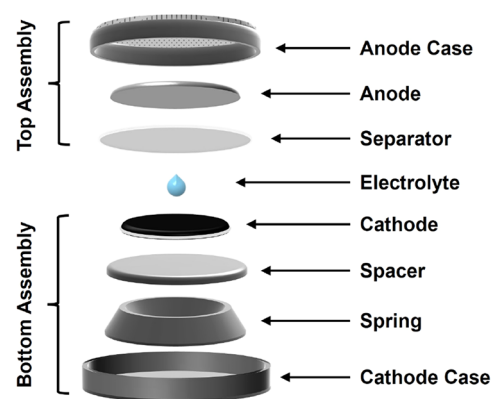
Schematic representation of the components of a coin cell with a relative position in the stacked assembly.
